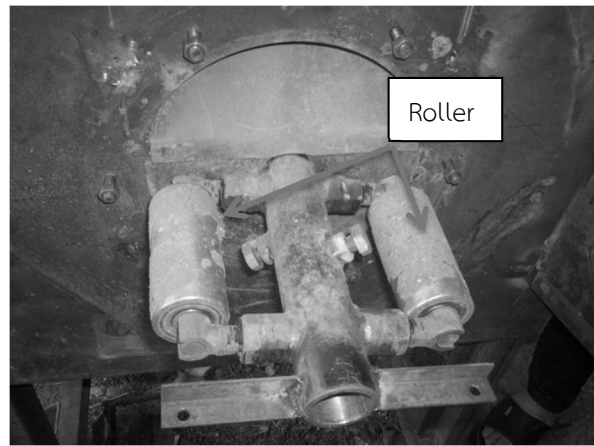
The roller of develop two pelleting die organic fertilizer compression machine.
